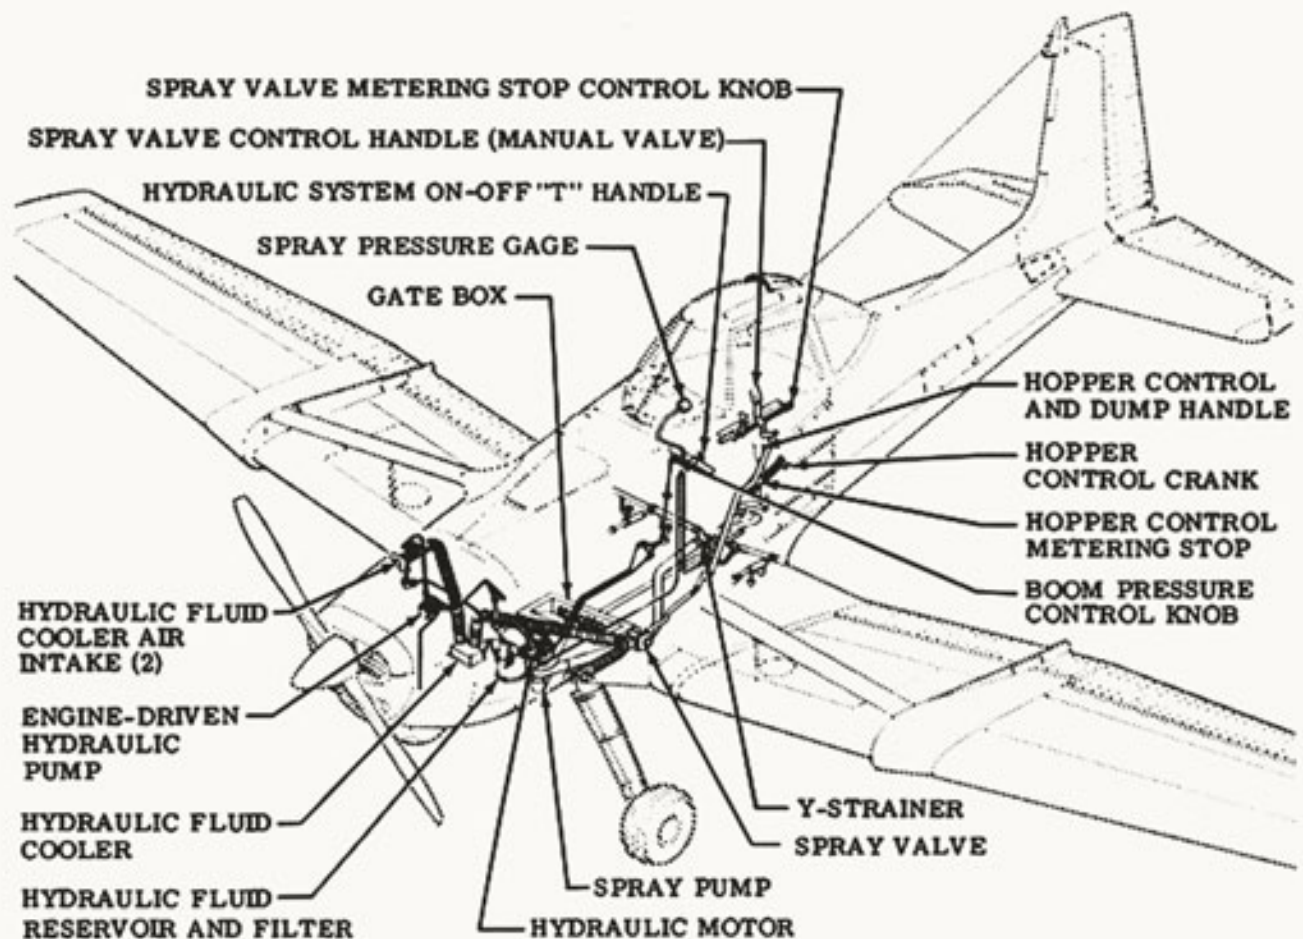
Liquid Dispersal System (Engine-Driven Hydraulic Pump)
